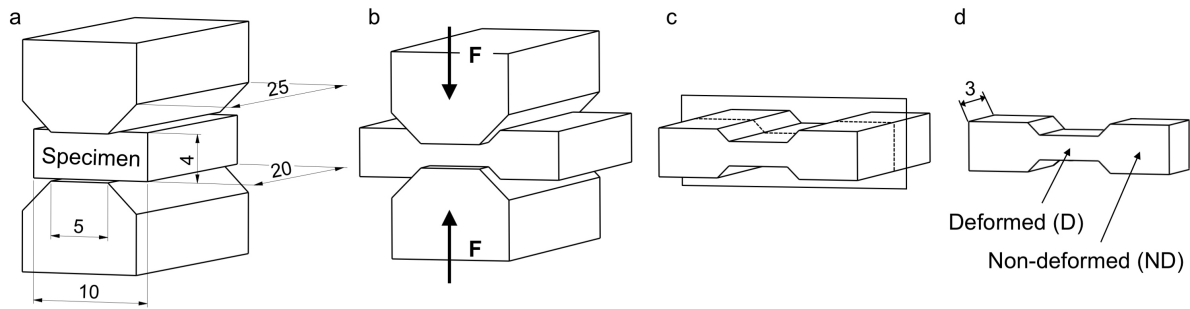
Specimen and anvils before (a) and after (b) plane strain deformation in a Gleeble[®] 3800 Hydrawedge system (dimensions in mm). Deformed specimen and cutting plane to machine dilatometer samples (c). Dilatometer samples with a thickness of 3 mm indicating deformed (D) and non-deformed (ND) sample positions (d).
